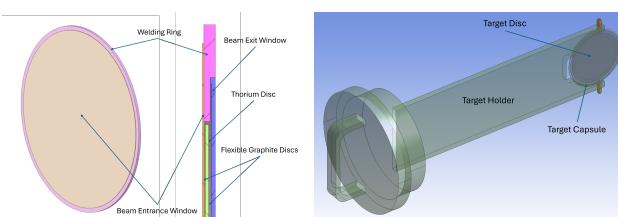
Engineering models of the target capsule assembly (left) and target holder assembly (right).
